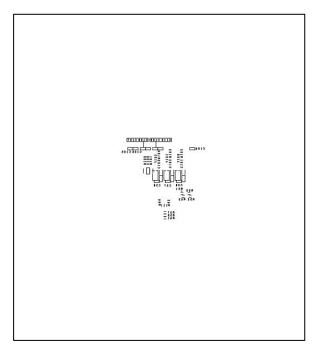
Bottom silk of PCB for Hall Sensor Driver
